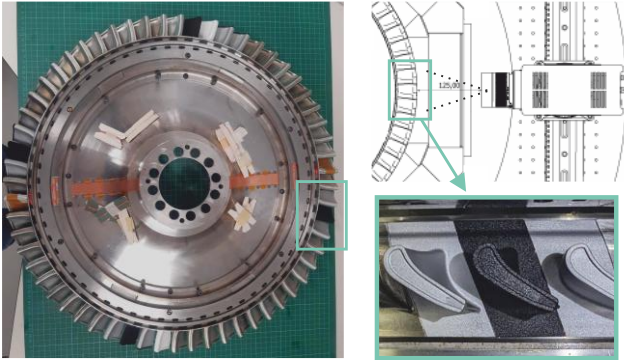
OTRF rotor assembly including photograph of rotor, setup schematic and photograph of typical FOV for rotor tip IR thermography measurements.
